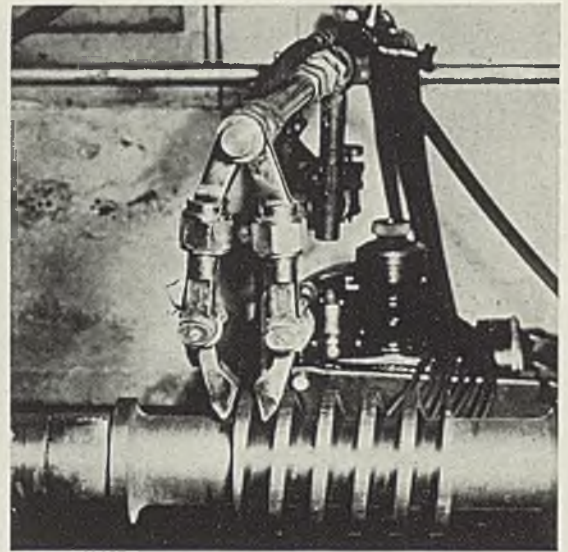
This is arrangement for flame hardening worms to give maximum life of wearing surfaces
